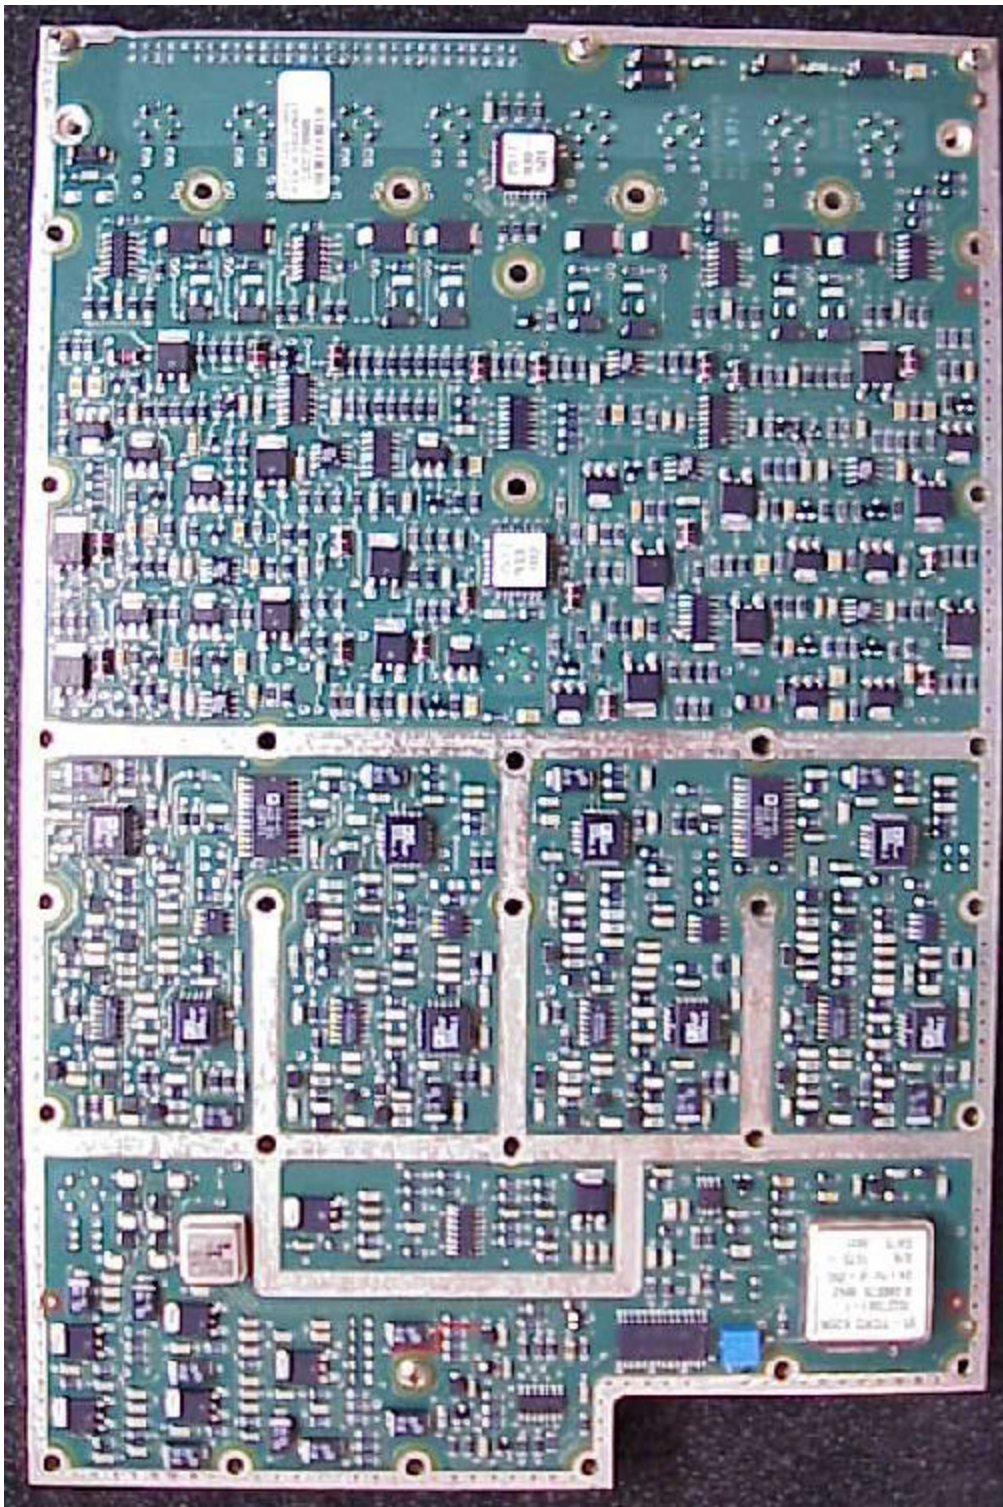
View of A5 Receiver – I/O Assembly with Shield Removed. Side A
